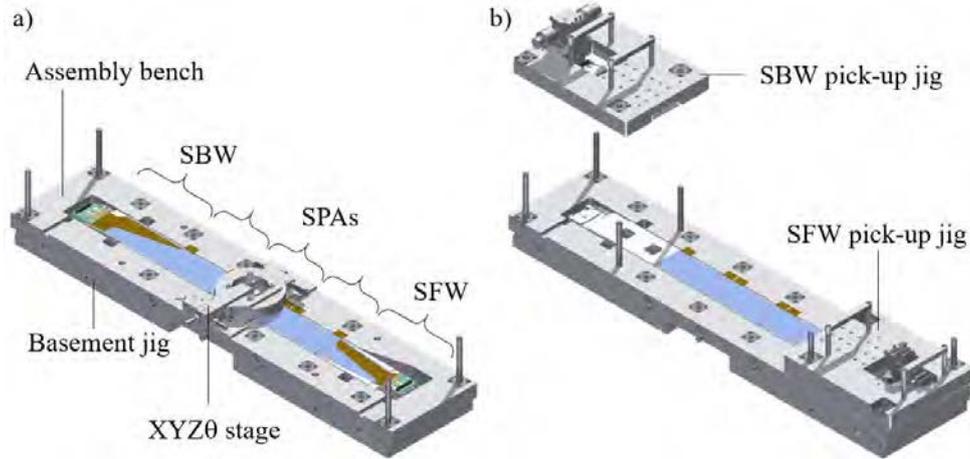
a) SPA(s), SBW and SFW placed on the assembly bench and aligned under the CMM using by the XYZθ-stage. b) SBW and SFW picked up for half-ladder assembly.
